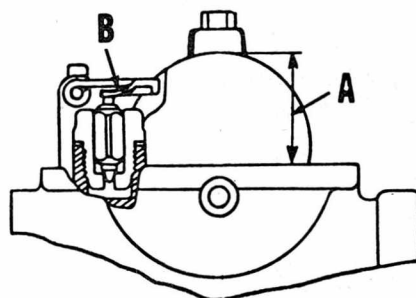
Float level (A) should be 21-24MM and is adjusted by bending tang (B). Float bowl gasket should be removed when checking.
